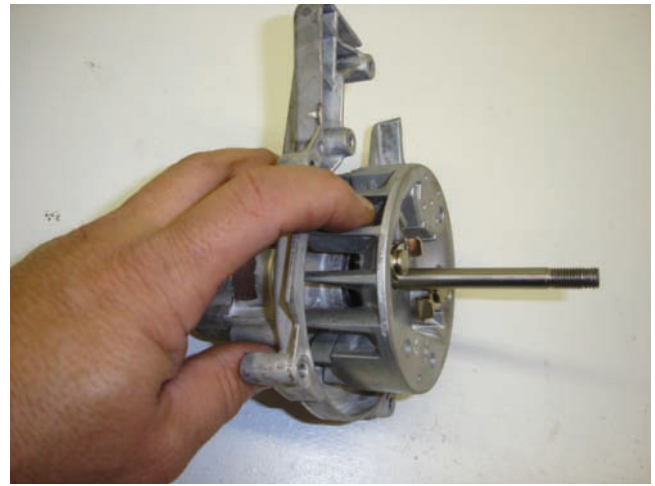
Before completing reassembly, always check to ensure that the bottom end components turn freely.
